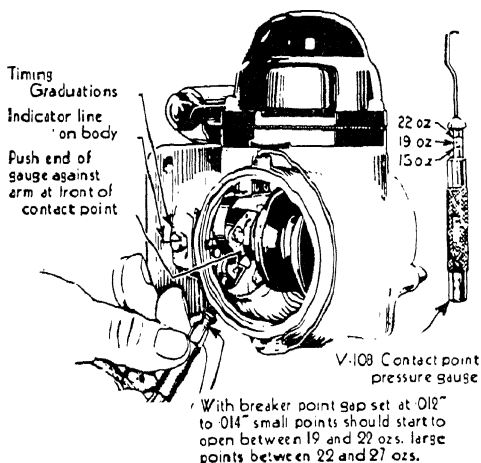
TESTING CONTACT-BREAKER SPRING TENSION
